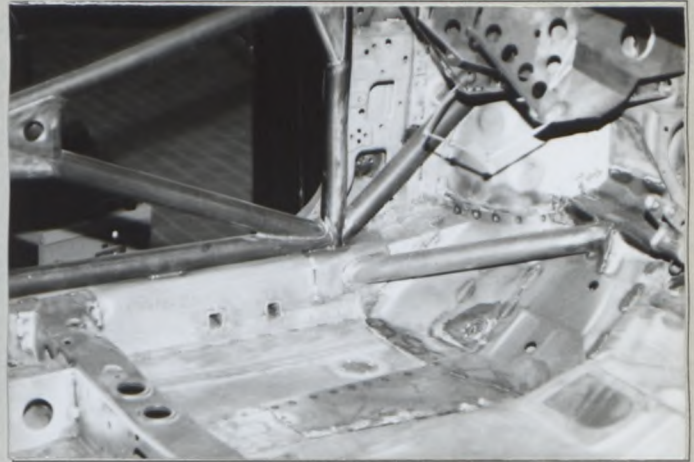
(MAIN HOOP TO PILLAR)
